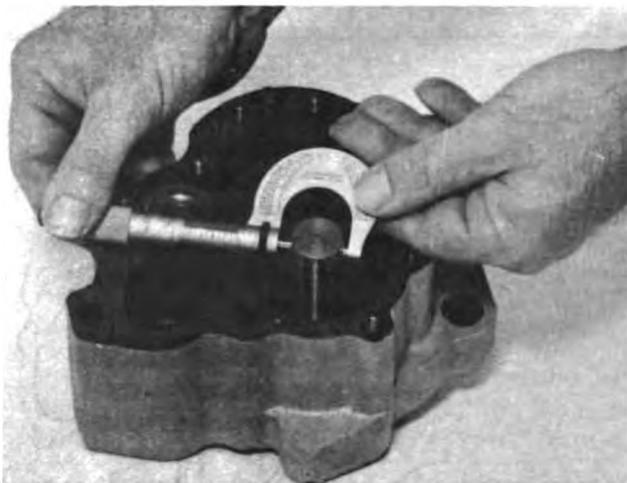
Measure The Outside Diameter Of The Idler Shaft.
